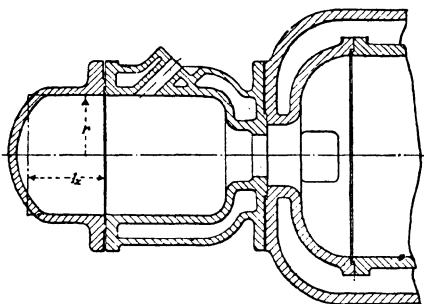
Vaporizer "H.A." Type Oil Engine
